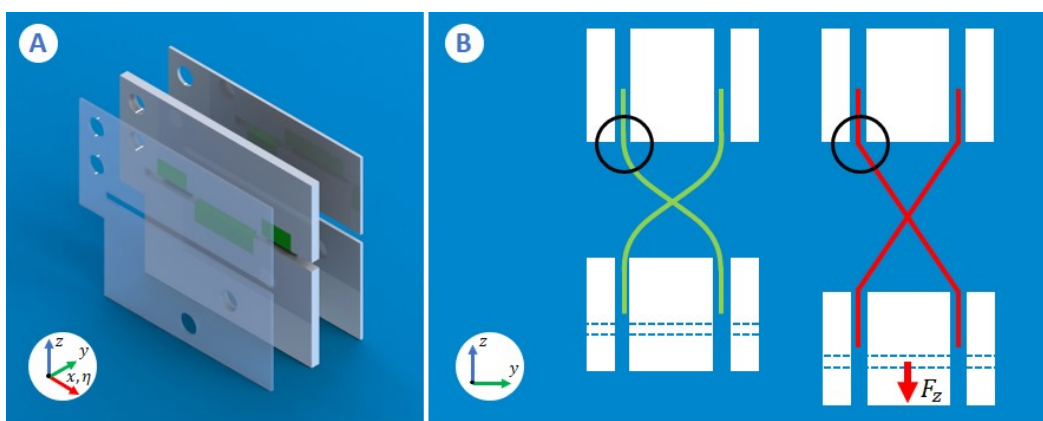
A: exploded view of a hinge assembly with the front plate made transparent. B: front view of the hinge assembly. The green flexures form an S-shape because of the way they are clamped into the hinge assembly. When a load in the negative z -direction is applied (F_z) the flexures form a Z-shape. The black circles show that the curvature for the two situations differs which may influence the bending stiffness of the hinge around the x -axis.
